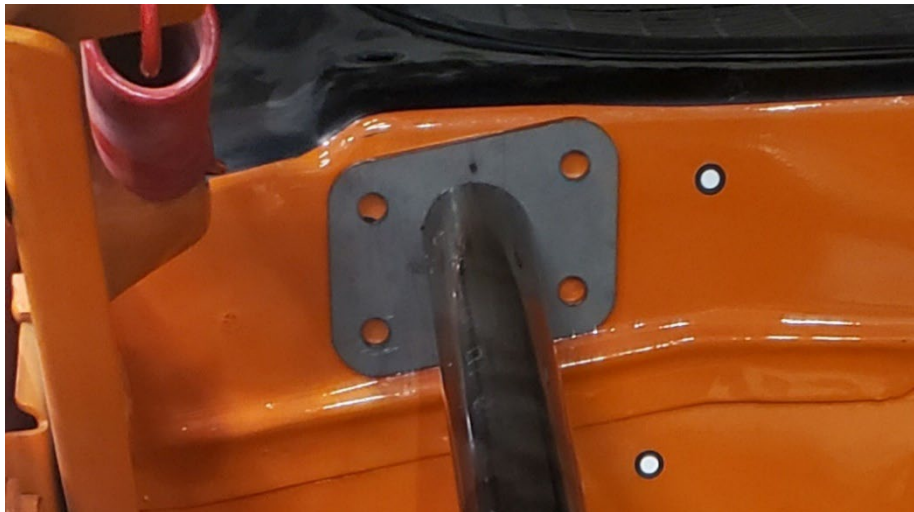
Lining the backing plate to the firewall to present where drilling holes is necessary
